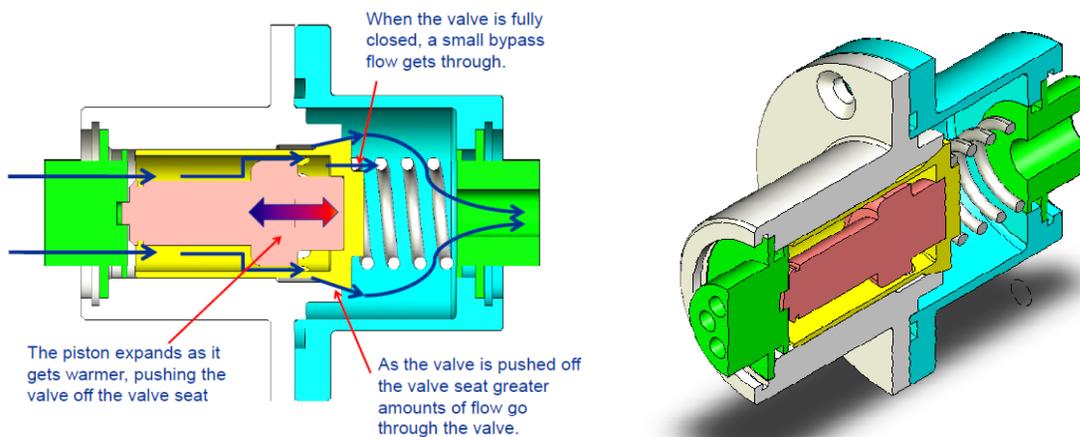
Thermostatic valve cutaway view showing internal parts.
